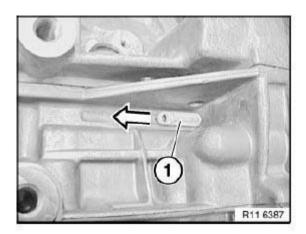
Identifying Fastener Courtesy of BMW OF NORTH AMERICA, INC.
